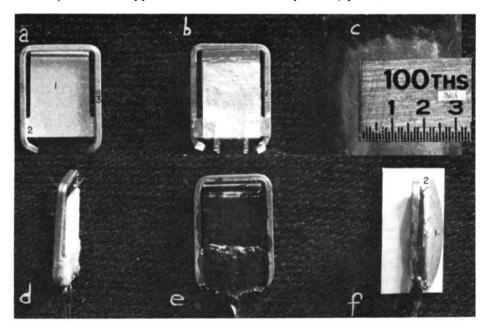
Construction of transducers C-11. a. elastic beam and mounting rail: 1. free end cantilever beam 2. clamping end 3. mounting rail. b. cemented gages. c. rubber sheet and sealing adhesive tape in periphery. d. side view of mounted gage with acrylic protection for grid-to-lead joint. e. waterproofed transducer and braided external leads. f. pressure cap in position: 1. cap 2. raised end of cantilever beam 3. raised tip of mounting rail.
